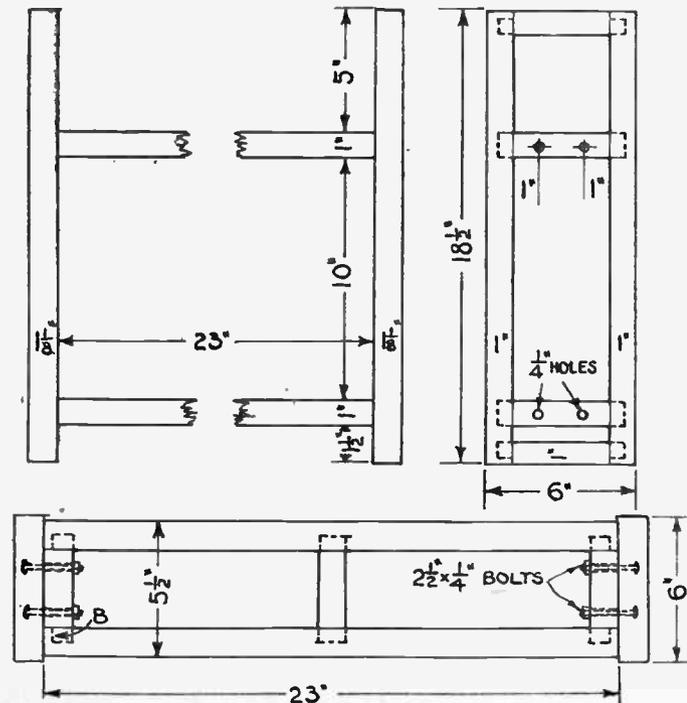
Front, end and plan of frameworks (rebates not shown)
